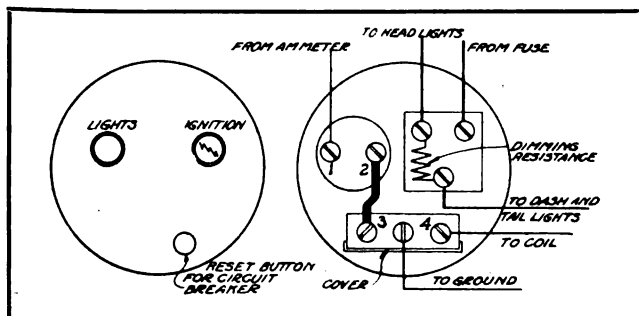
Front and Rear Views Ignition and Lighting Switch With Ignition Circuit Breaker.
